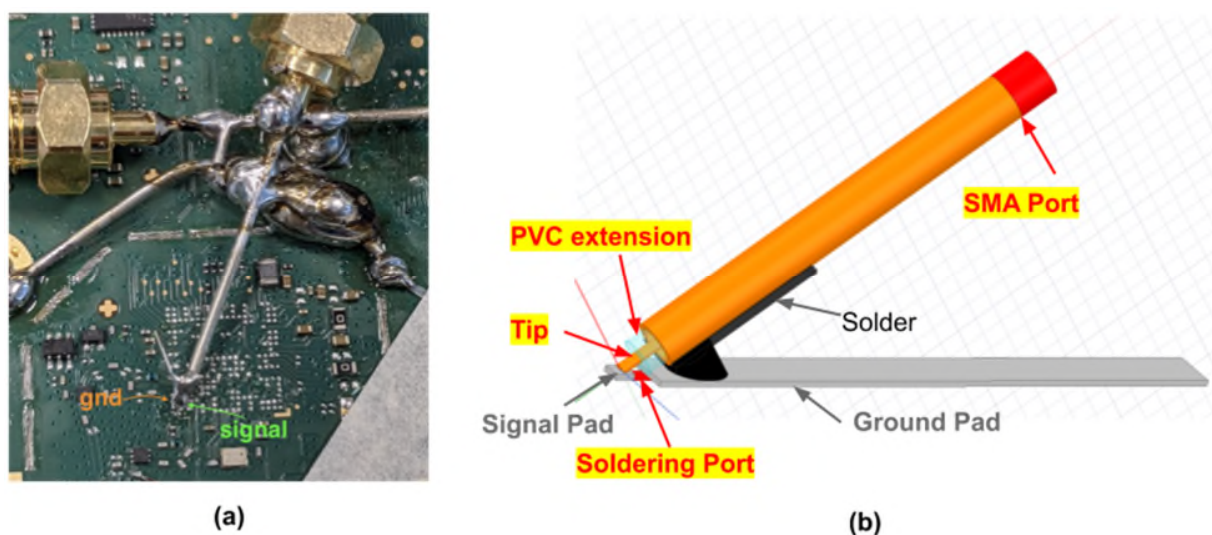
Pigtail probe attached to a printed circuit board (PCB)
